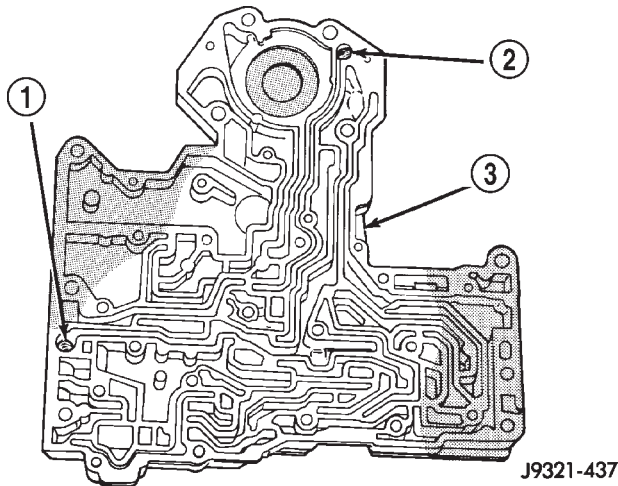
Rear Clutch and Rear Servo Check Ball Locations
